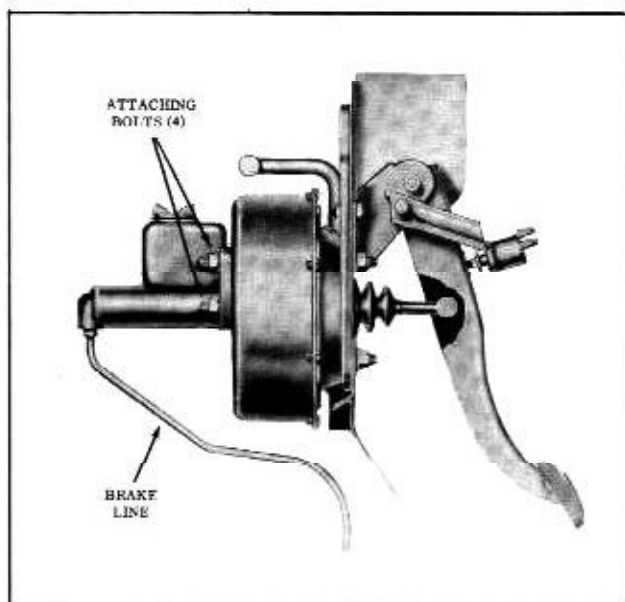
Master Cylinder Attachment (Power Brake)
